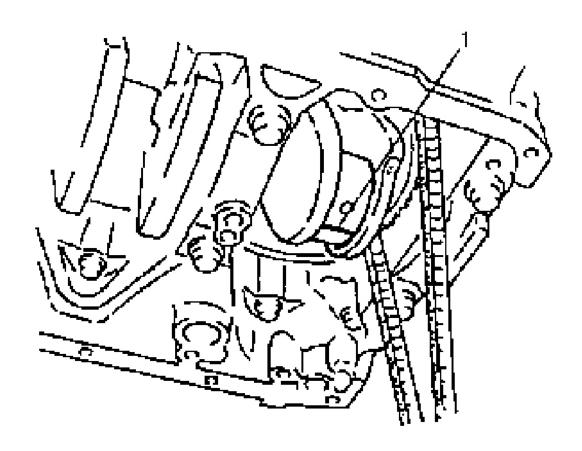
Checking Connecting Rod Bearing Clearance Courtesy of SUZUKI OF AMERICA CORP.
